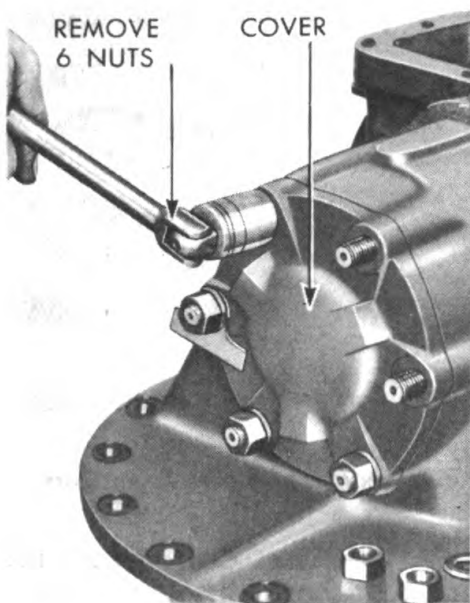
Removing Bevel Drive Pinion Shaft and Pinion From Carrier
